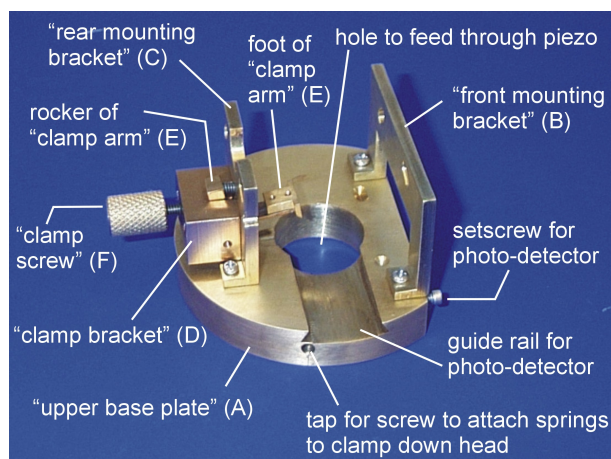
Partially assembled top part of the AFM head. Letters in brackets correspond to construction drawings.
